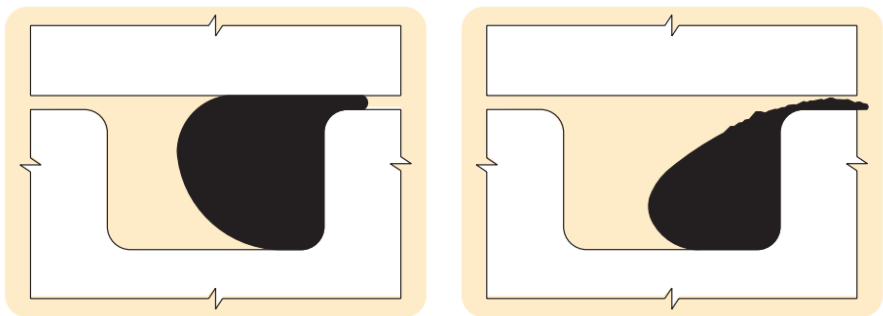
O-ring extruding (left) and extrusion failure (right).
